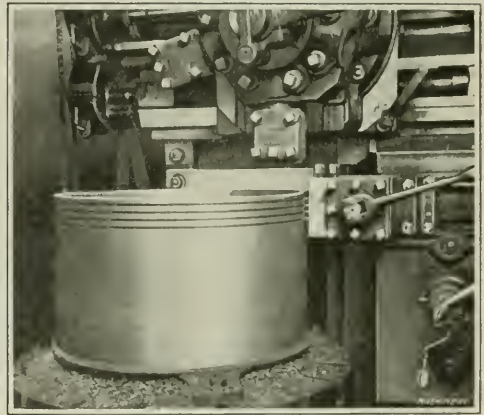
Using the Set-up illustrated in Fig. 7 for cutting off Piston-rings with a Gang of Parting Tools
